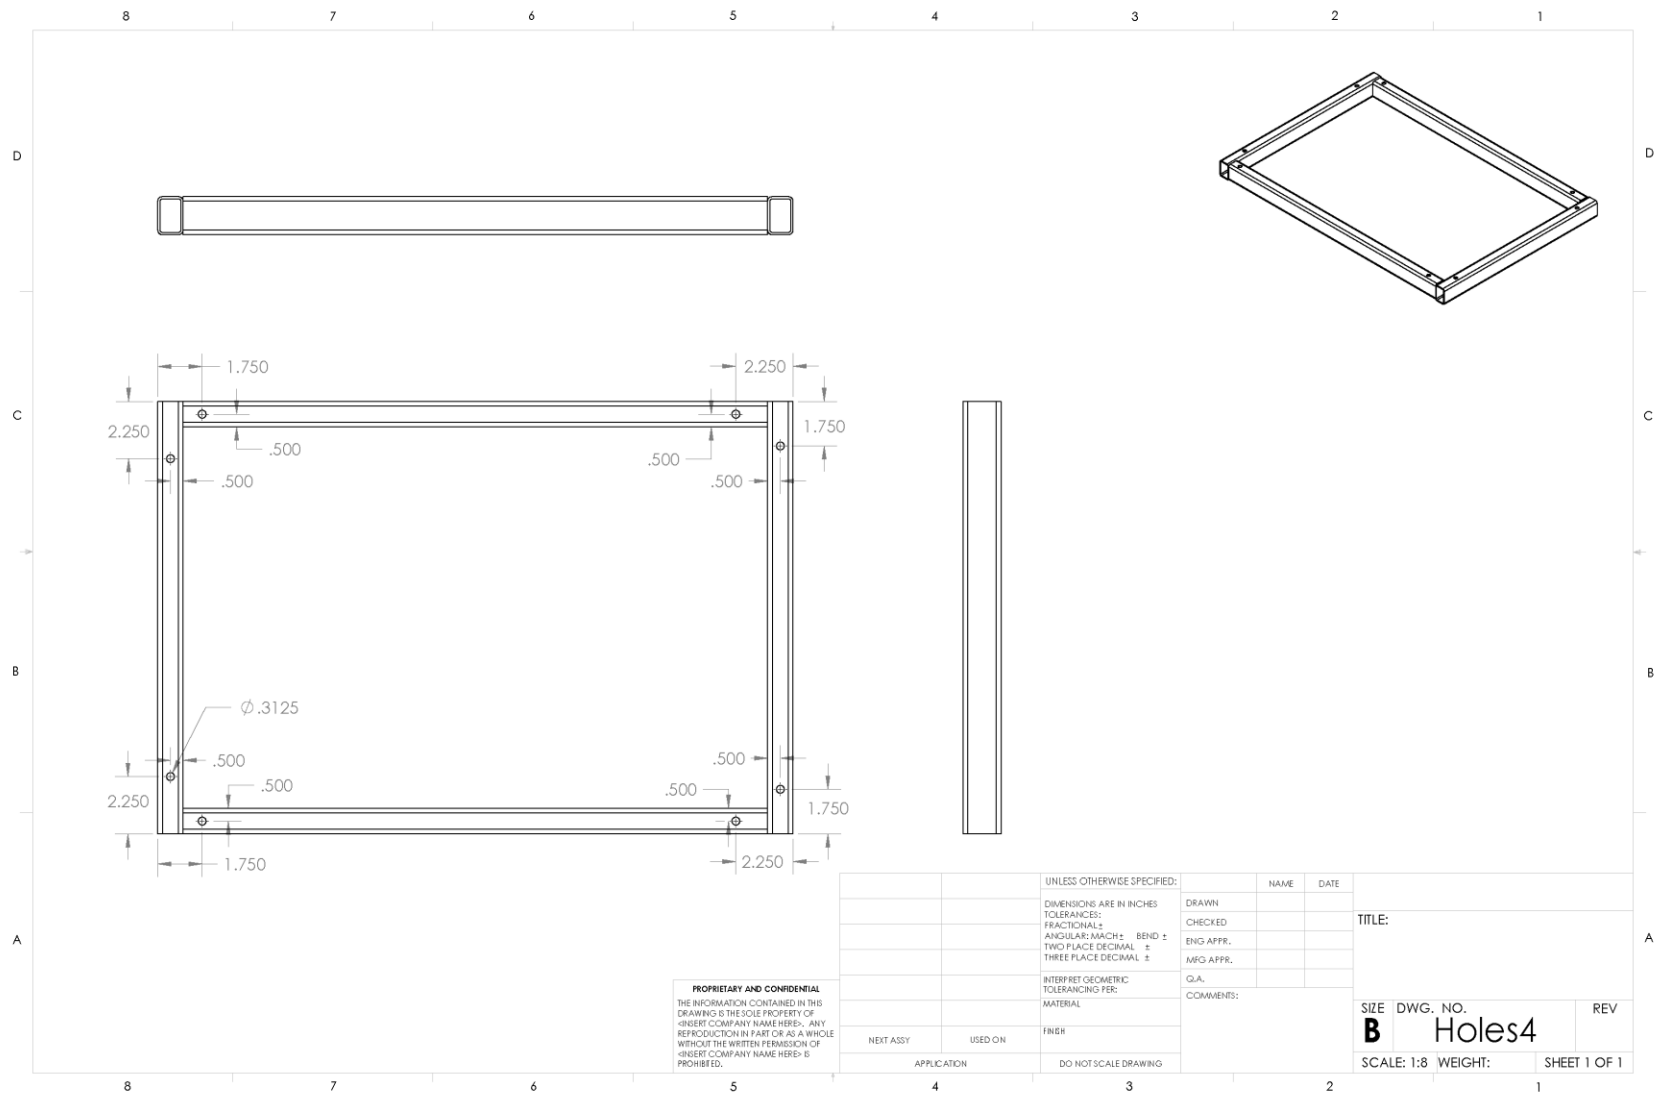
Drawing of Location of Holes for Mounting Pulleys
